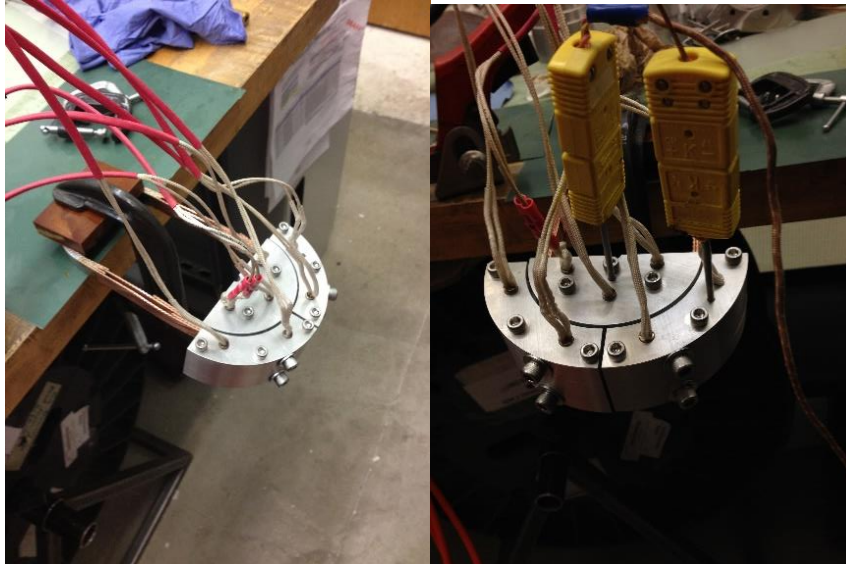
Inter-Coil Splicing Fixture with Short Cartridge Heaters
